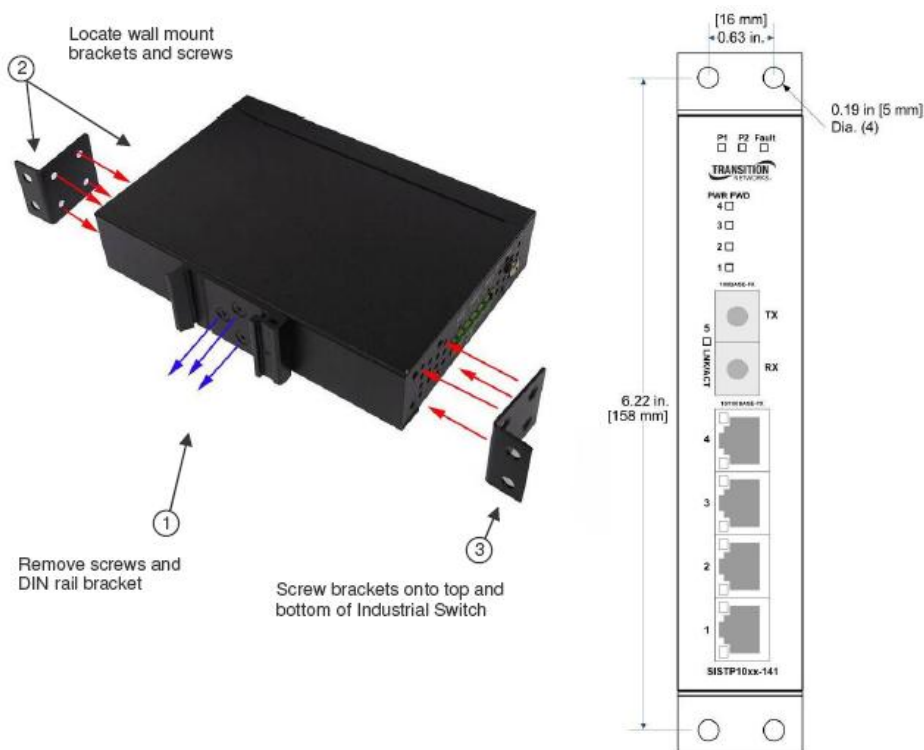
Installing wall mount brackets to Industrial PoE Switch
